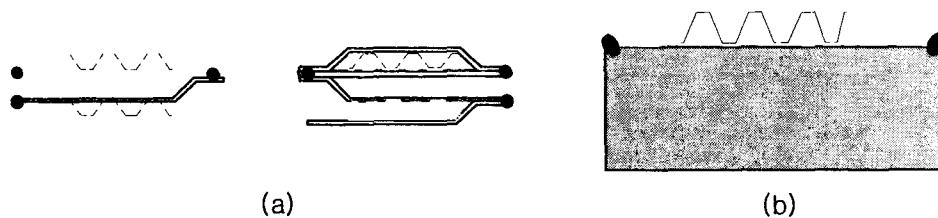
Joint configuration. (a) formed panel overlap weld (b) end plate overlap weld
